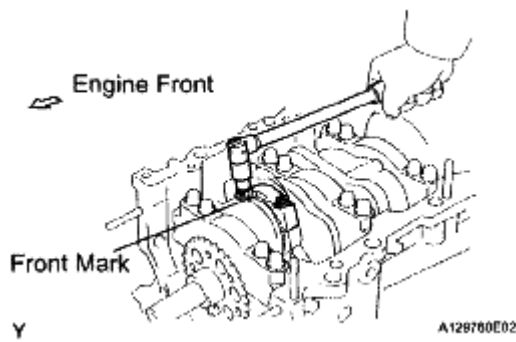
Identifying Front Mark Of Connecting Rod Cap
